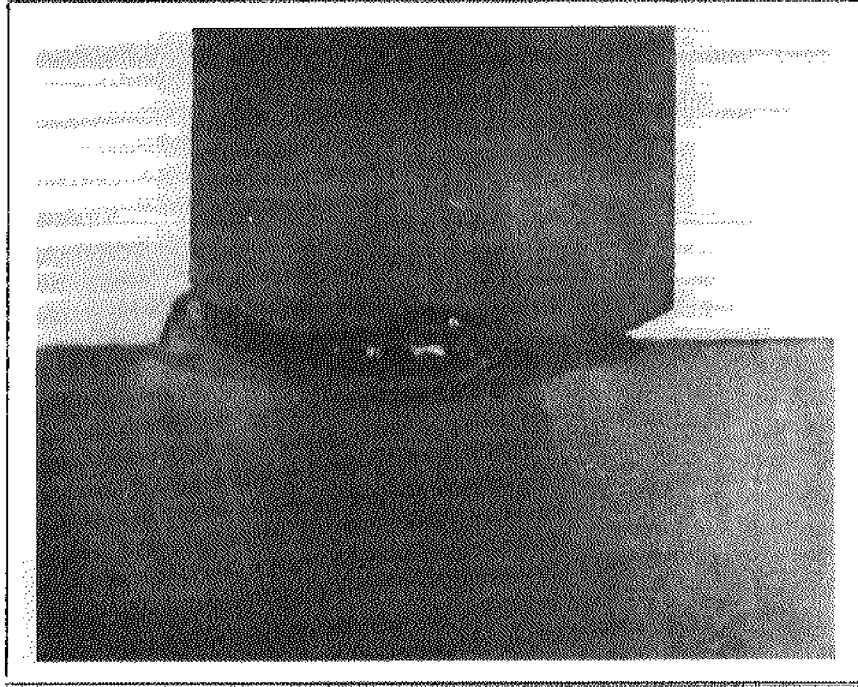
Weld defect --- Extremely cold weld
